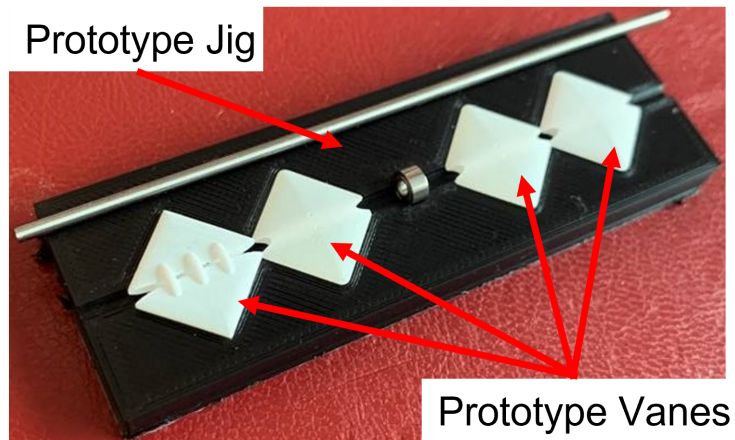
Prototype jig designed to aid in the alignment and spacing of the vanes and bearings along the steel shaft.
